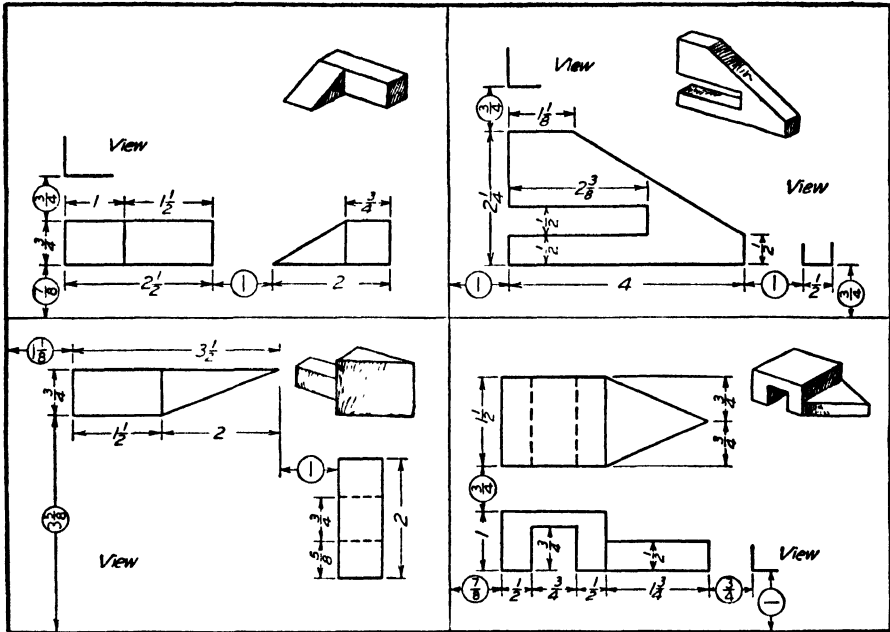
Probs. 83 to 86. Draw three complete views of each adjusting block.
